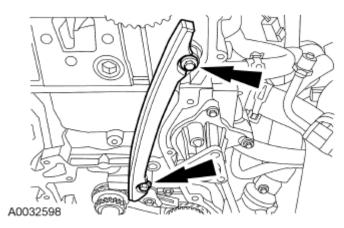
Locating LH Timing Chain Guide Bolts Courtesy of FORD MOTOR CO.
